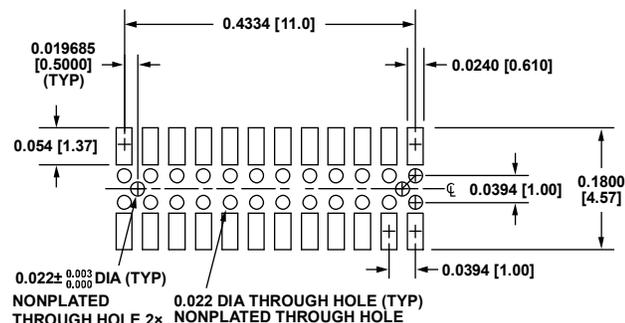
Suggested Layout and Mechanical Design When Using Samtec CLM-112-02-G-D-A for the Mating Connector
